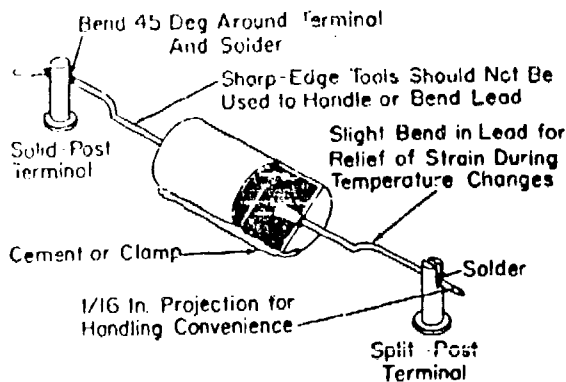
Proper mounting technique for lead-mounted capacitor or resistor./19/
